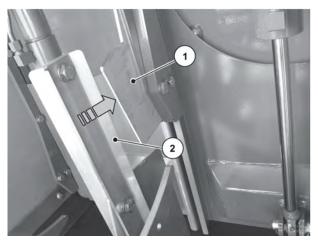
Inserting the partition plate into the guide[1] Metal sheet guide [2] Guide holder
